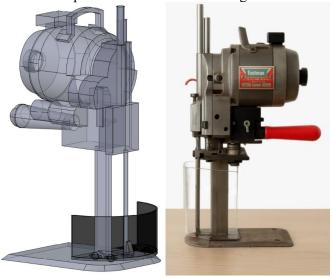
The final shape of the protective cover after its implementation on the Straight knife fabric cutting machine.
